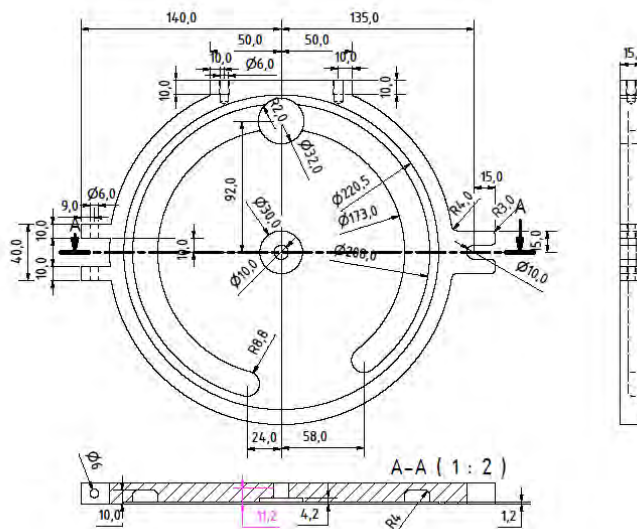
Technical dimensions and view of the lid for left side metering unit in the direction of travel (dimensions are in mm)
